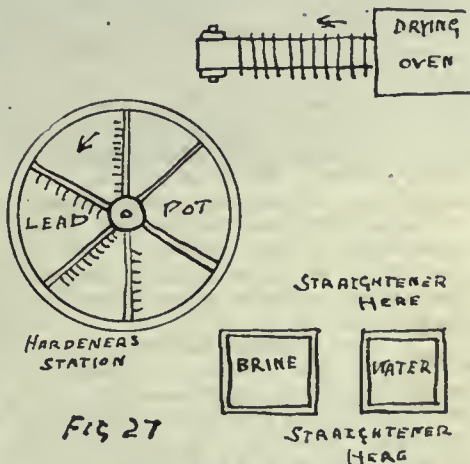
SKETCH OF HARDENING MACHINE AND HOW WORK IS HANDLED.
